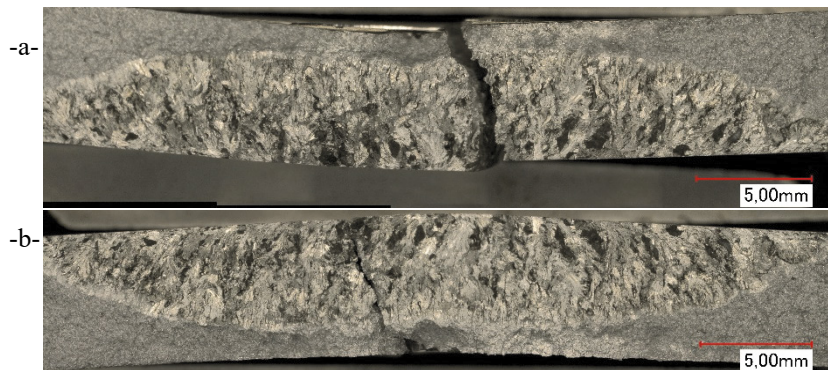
Macroscopic fatigue crack ( $\sigma_{\max} = 140\text{MPa}$ ;  $N=3.46 \times 10^8$  cyc): a) upper part and b) lower part of the fractured specimen shown in Fig.6b.
